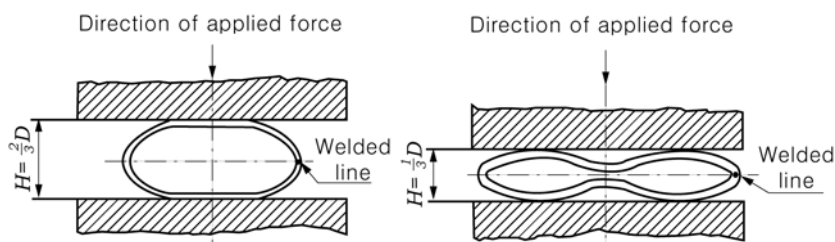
Flattening test of electric-resistance welded steel pipes Grade 1
